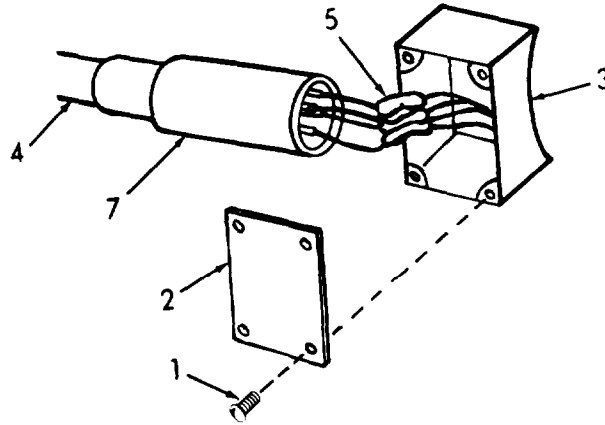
Power Cable Replacement (Electric Motor Driven Pump).
